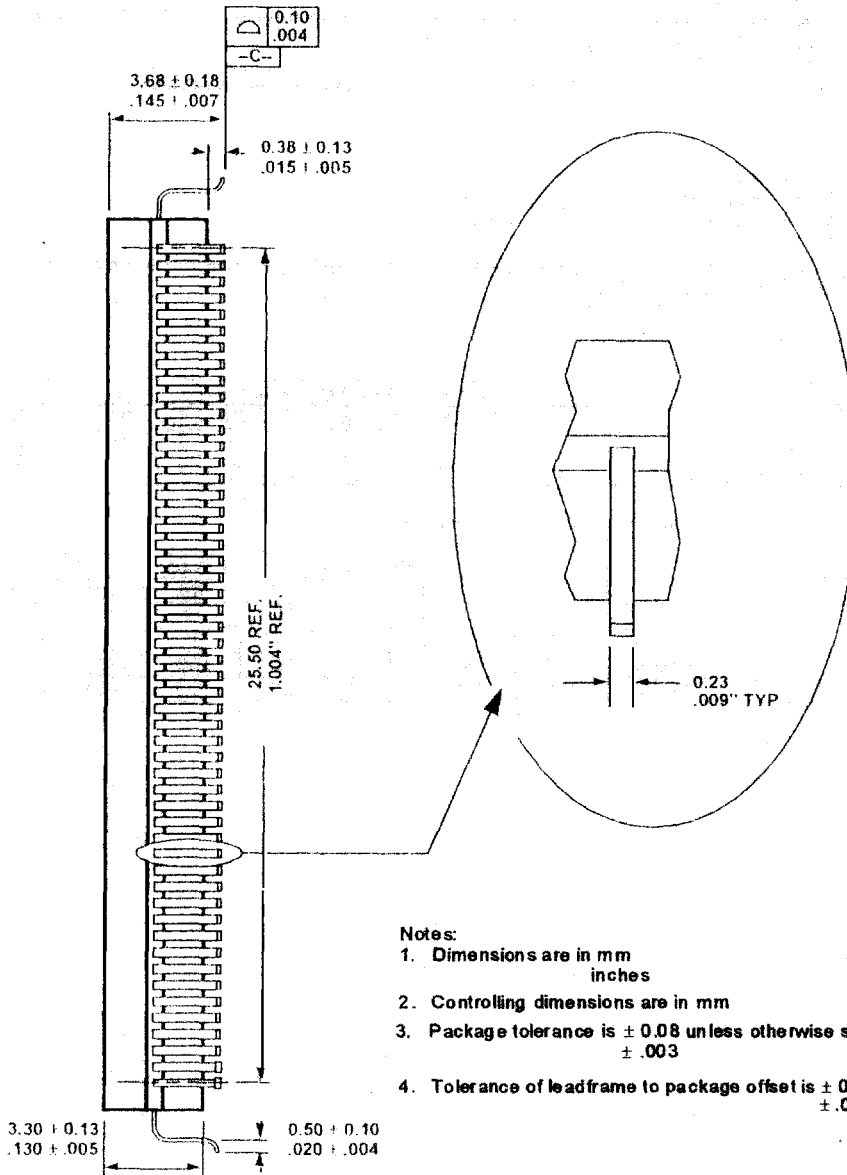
Package Dimensions (bottom view, cavity down)
